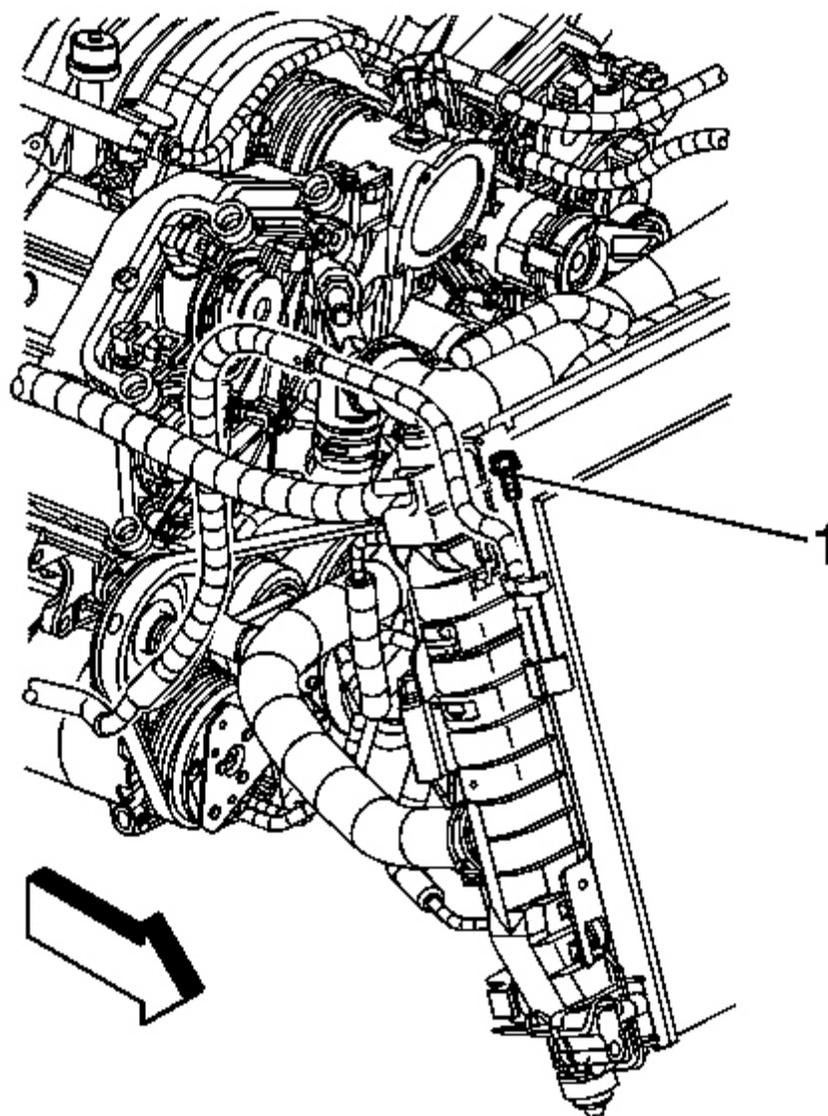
Identifying A/C Compressor Hose Assembly Bolt & A/C Condenser Fitting
